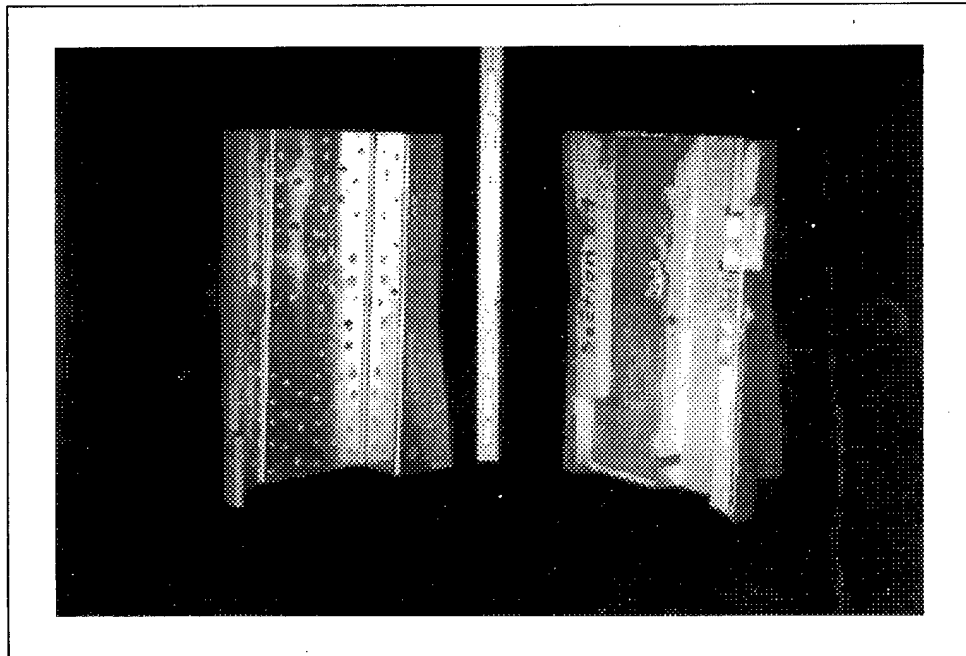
Balsa Sections Mounted to Sheet Metal Frame and Covered with Fiberglass (Bottom View)
